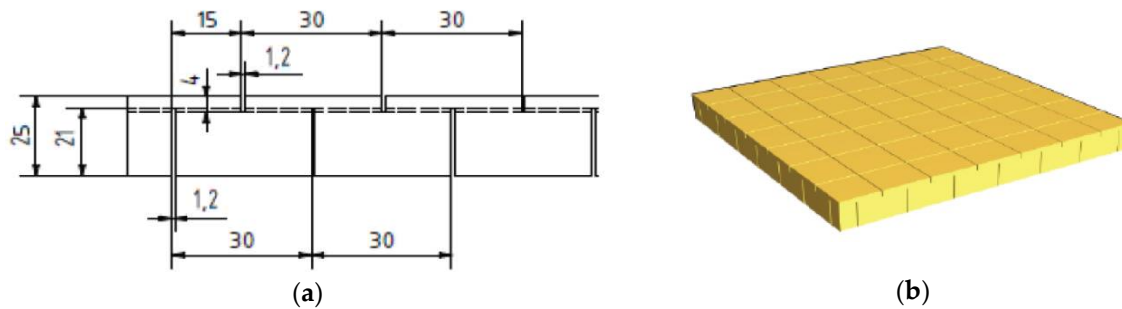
The structure of the FlexiCut foam: (a) sketch (b) 3D-view
